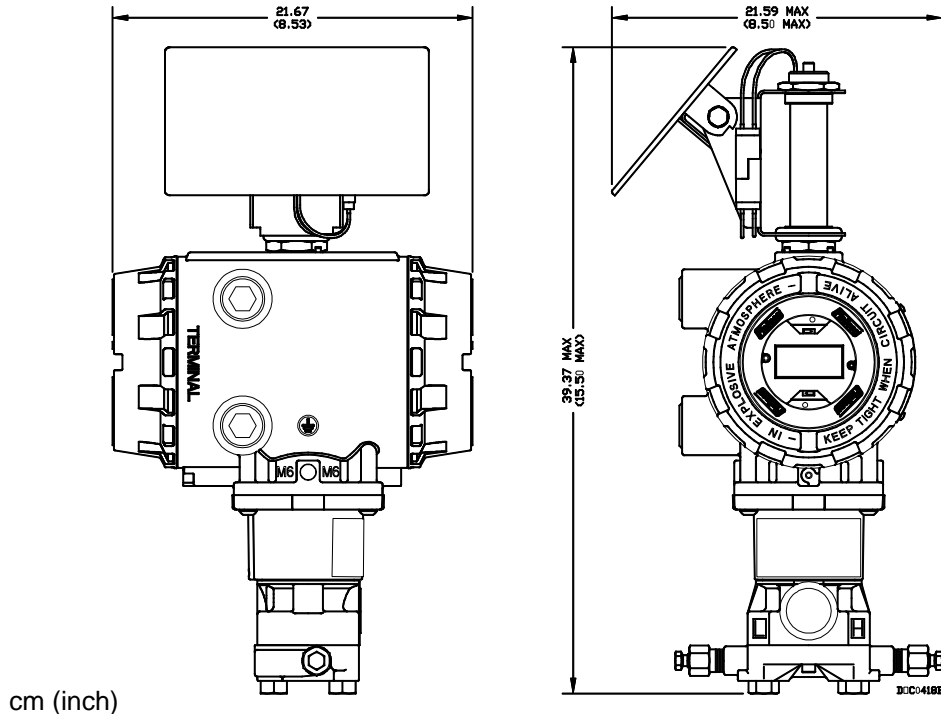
Outline and Mounting Dimensions with 2 Watt Solar Panel and LCD
